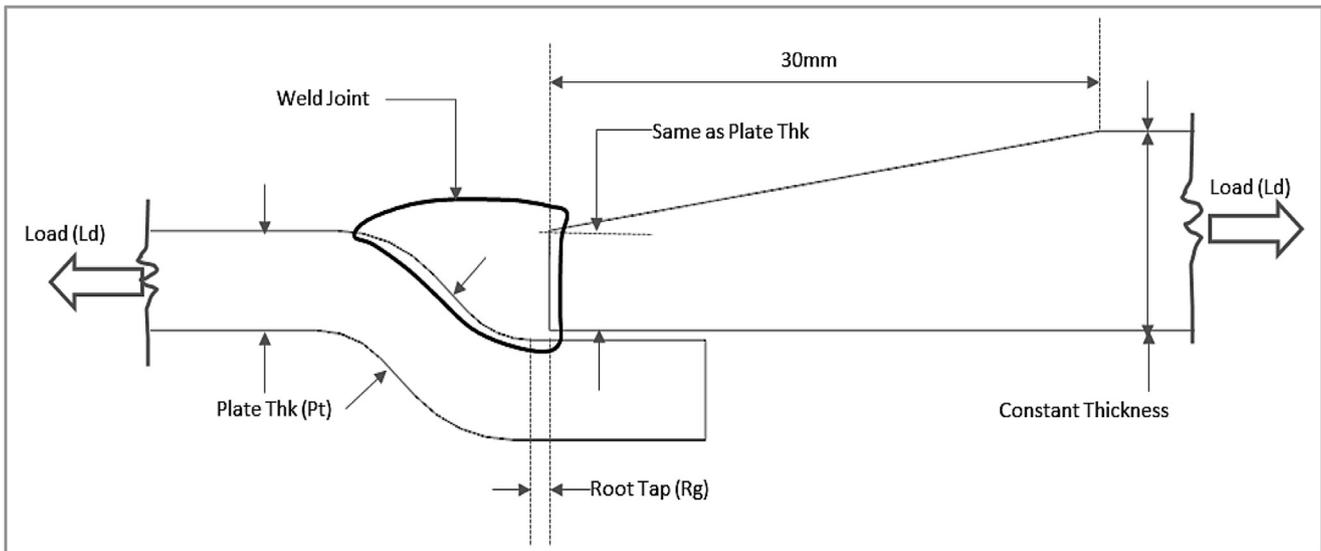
Joggle weld joint with parameters definitions.
